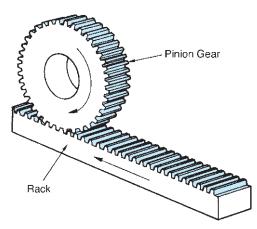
In a rack and pinion gear set, when the pinion gear rotates, the rack moves sideways. (*Reproduced with permission of Deere & Company,* © 1972, Deere & Company. All rights reserved.)
